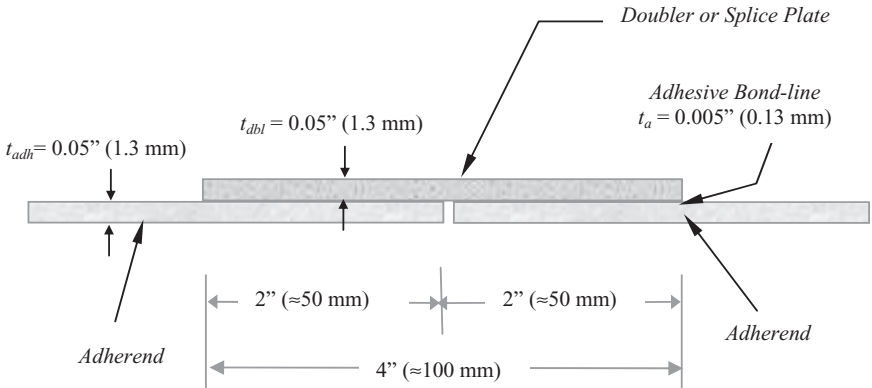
Geometrical details of the bonded single-doubler (single-strap) butt joint of Example 5-2.
